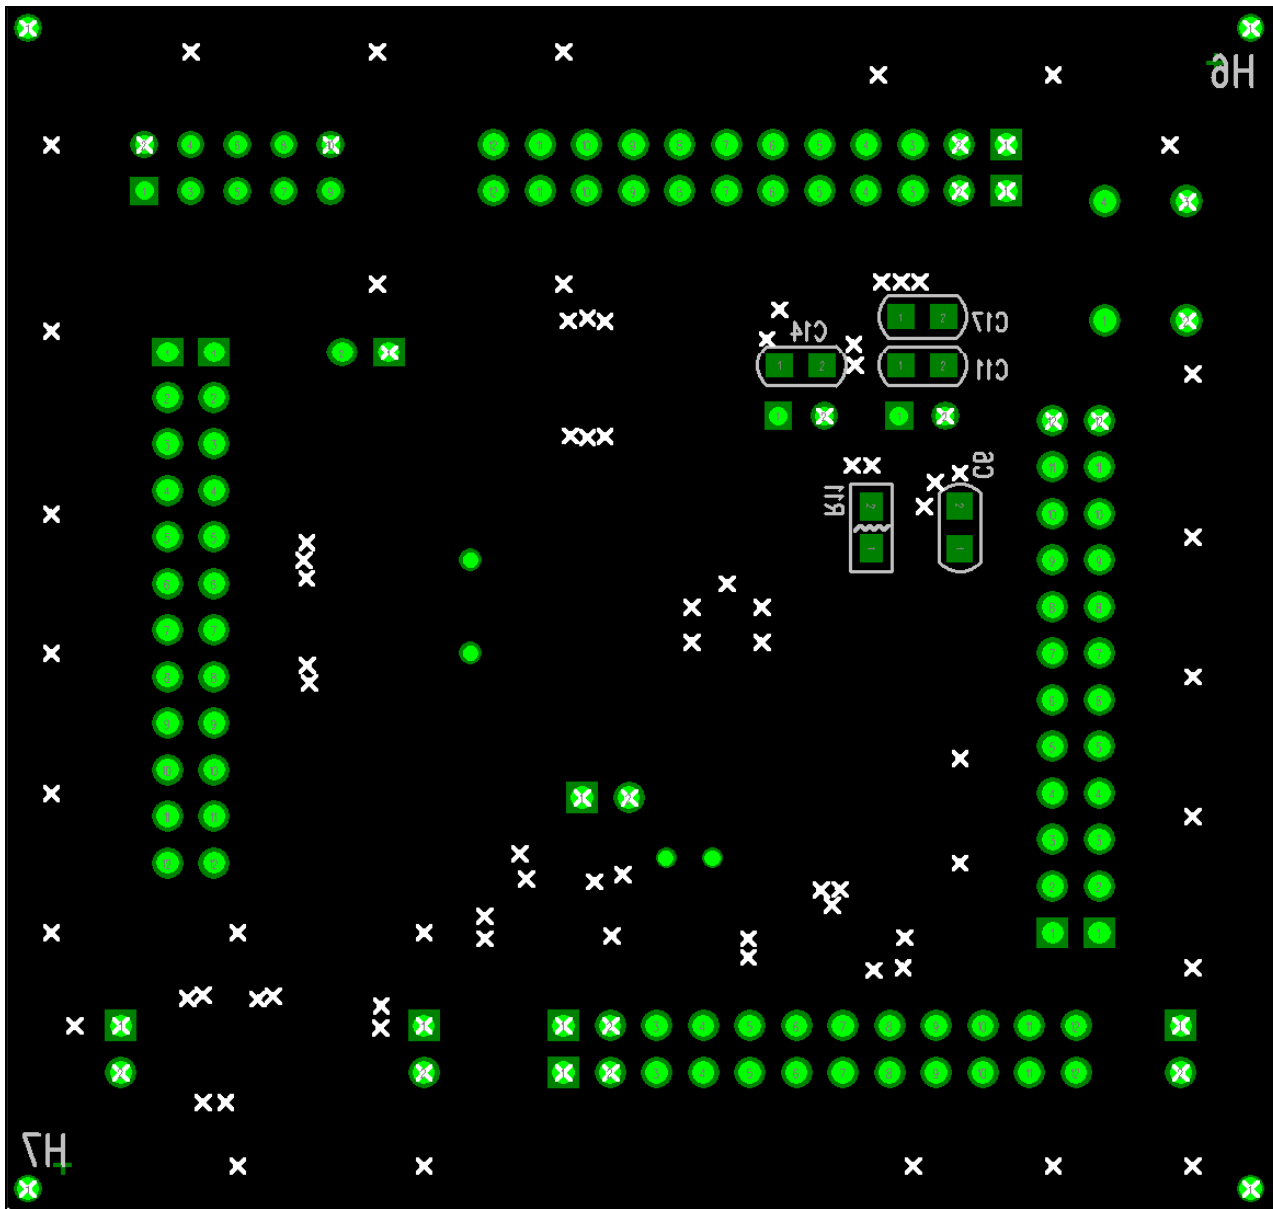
IS31CS8967A Evaluation Board Component Placement Guide - Bottom Layer
